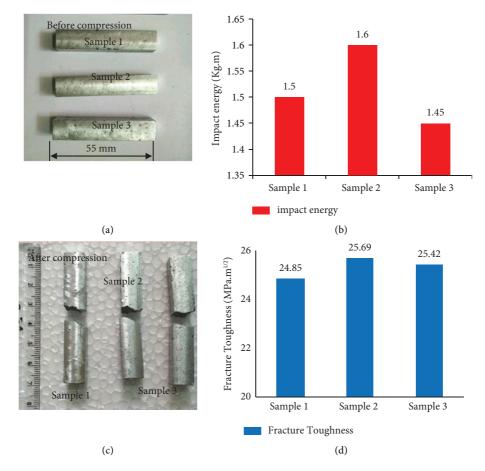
(a) Charpy test specimen before V-notching; (b) impact energy values of the composite specimen; (c) specimen after Charpy test; (d) fracture toughness of composite specimens.
